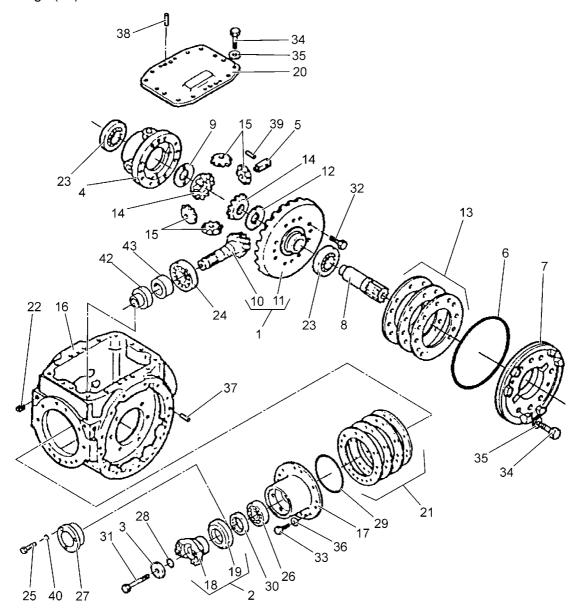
D.47. Rear Axle Differential Assembly Exploded View (520G)
